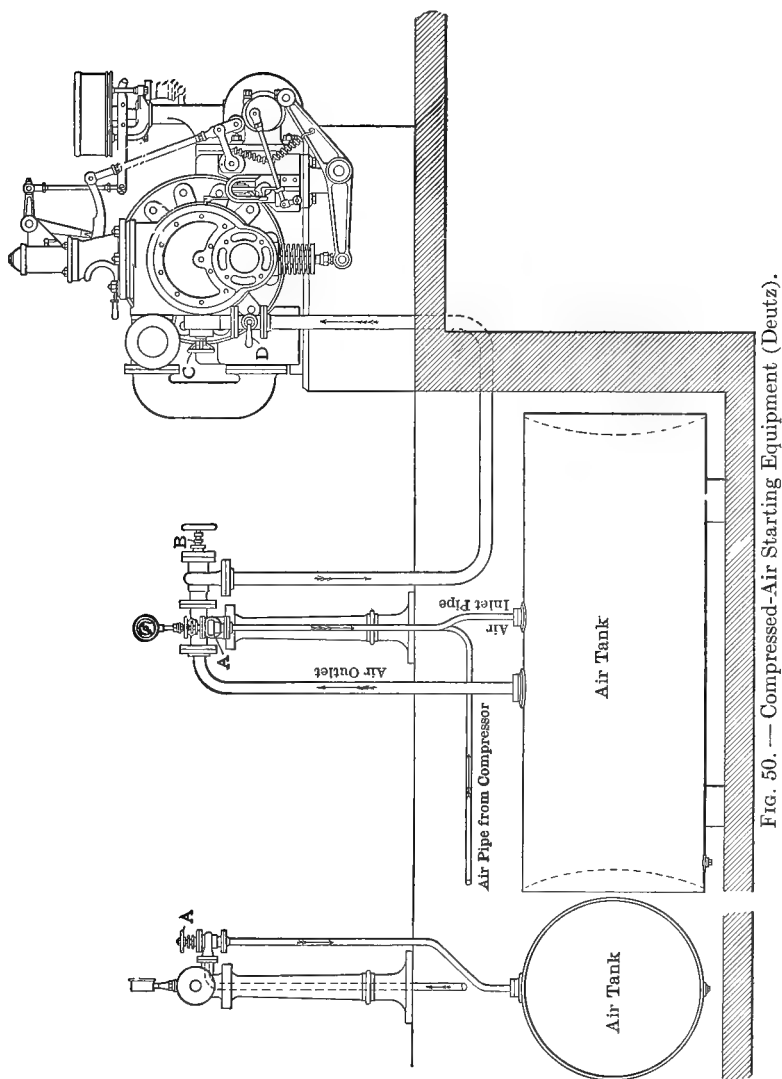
Compressed-Air Starting Equipment (Deutz).
